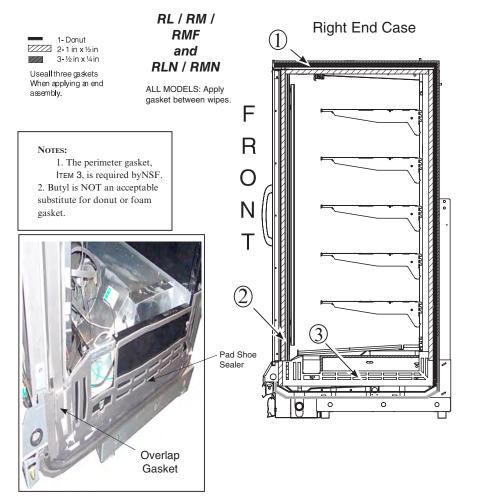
B, Part 2. Apply Gaskets to Right End of RL/RM/RMF and RLN/RMN
